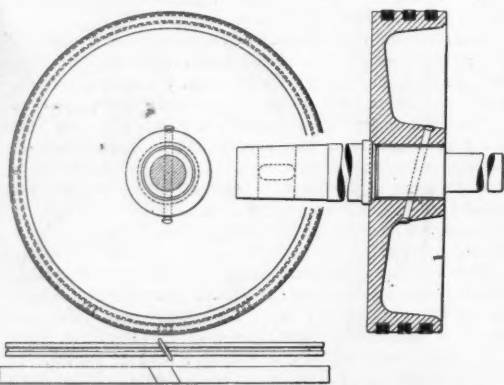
Piston for Locomotive Using Superheated Steam.
